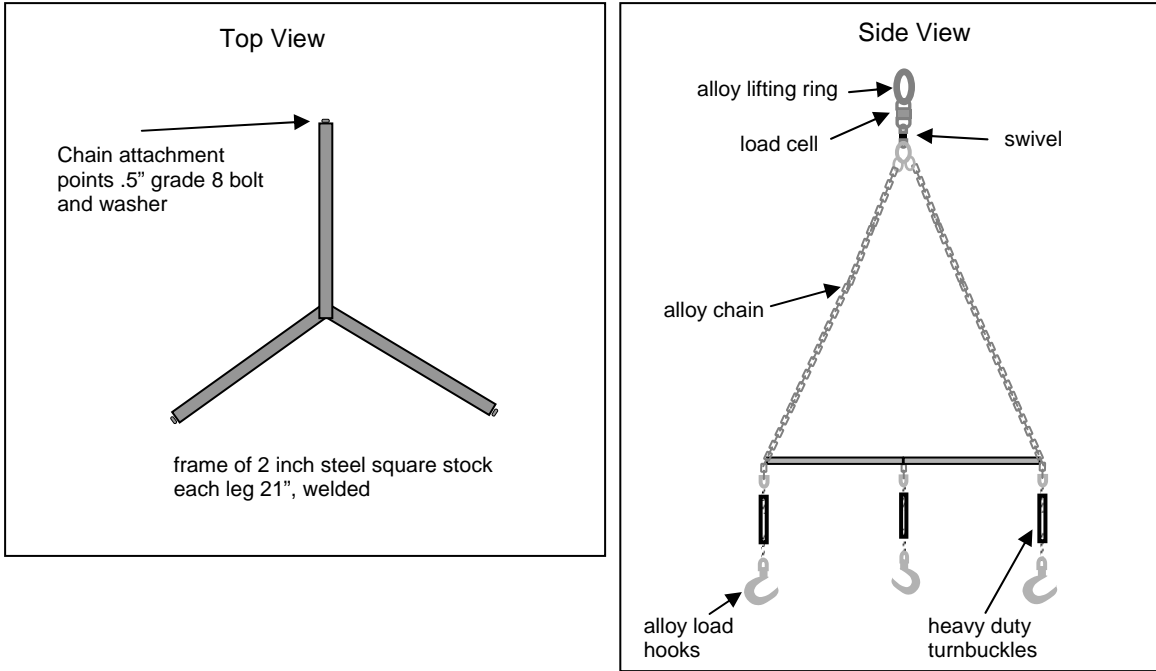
Detail of tank lifting, leveling and weighing apparatus used with the crane.
